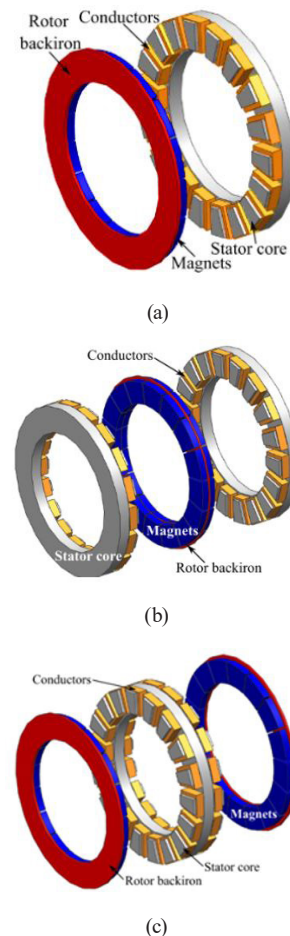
Main configurations of axial flux machines: (a) single-stator single-rotor, (b) double-stator single-rotor, and (c) single-stator double-rotor (Jenkins et al., 2023)
